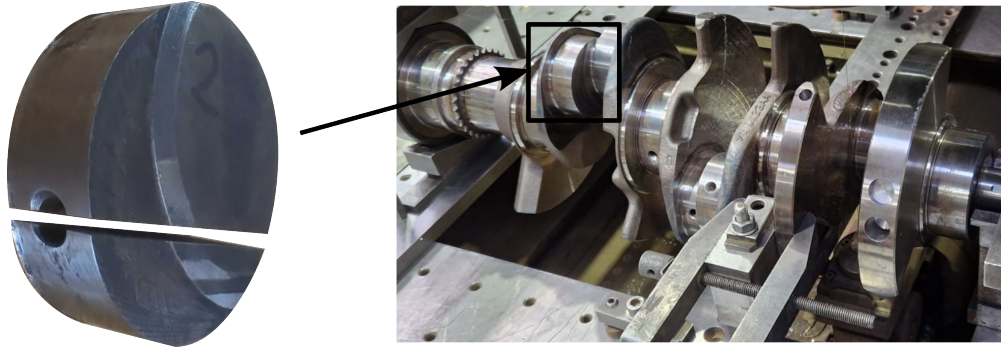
Sectioned crankshaft journal bearing specimen and extraction location
